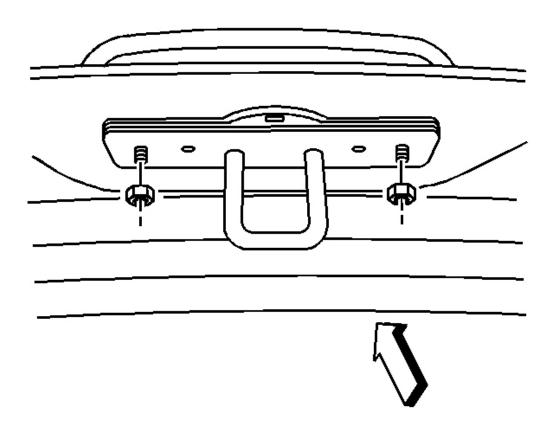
Identifying Striker Assembly & Retaining Nuts Courtesy of GENERAL MOTORS CORP.
